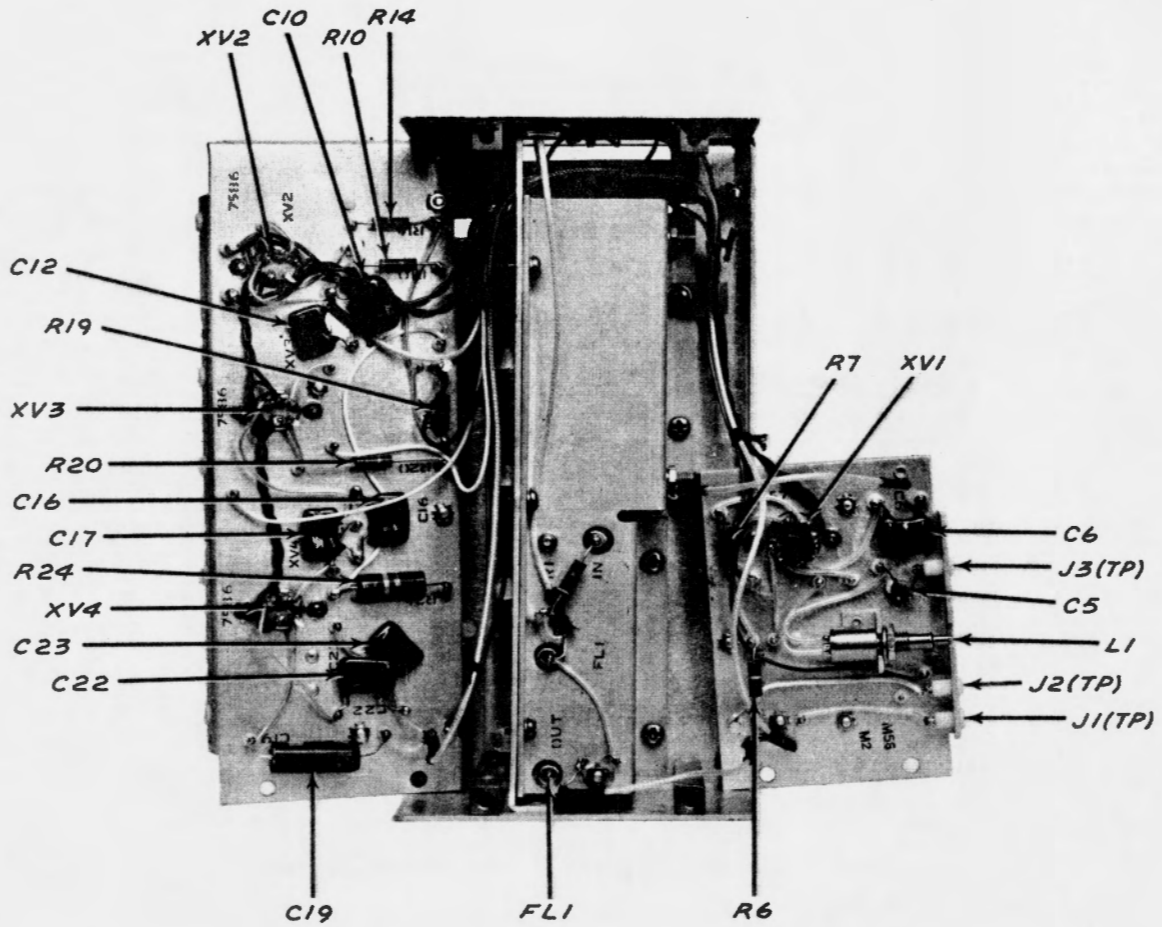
1st Injector A1A10, Parts Location and Test Points, Disassembled
